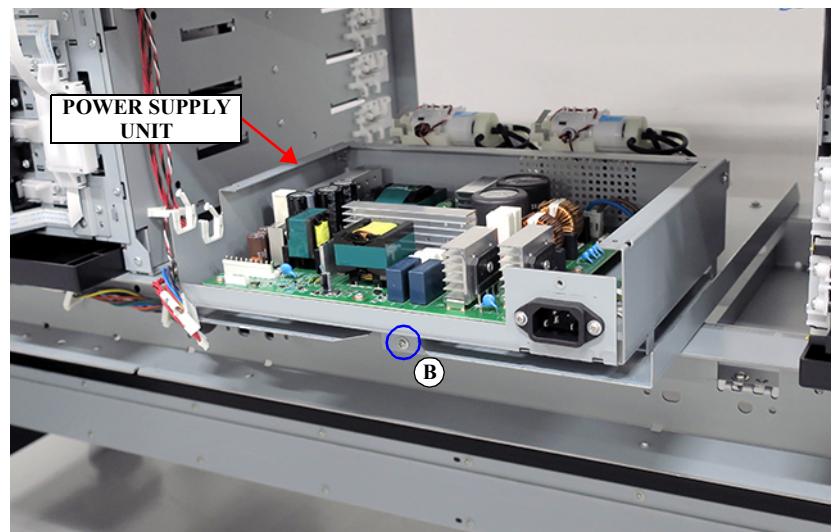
Removing the POWER SUPPLY UNIT (3)
